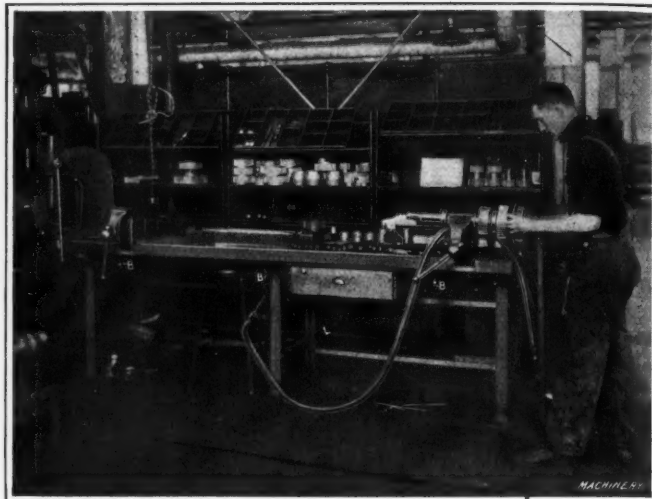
Shaft Assembling Bench with Three Stock Racks in Place
